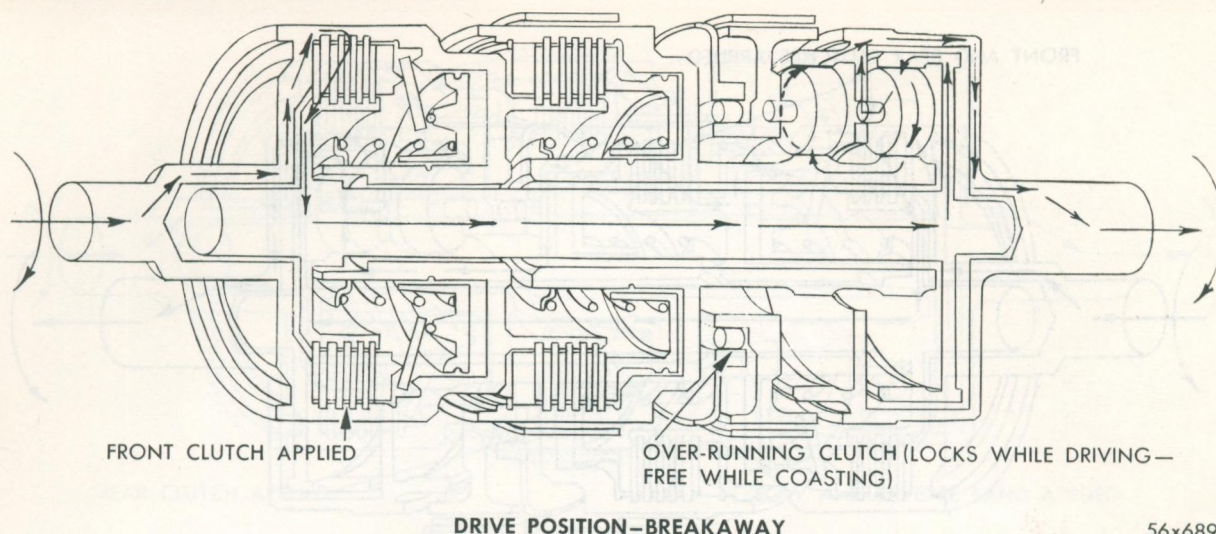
Power Flow in D (Drive) Position—Breakaway
